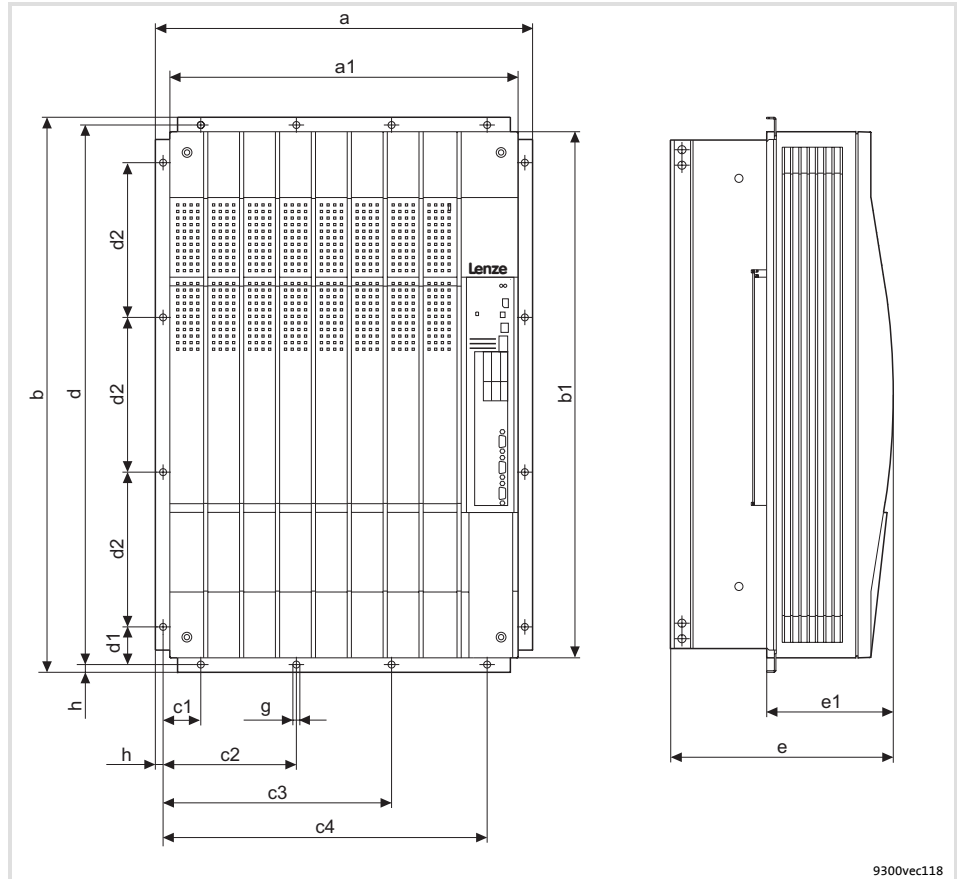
Dimensions for thermally separated mounting 75 ... 90 kW
